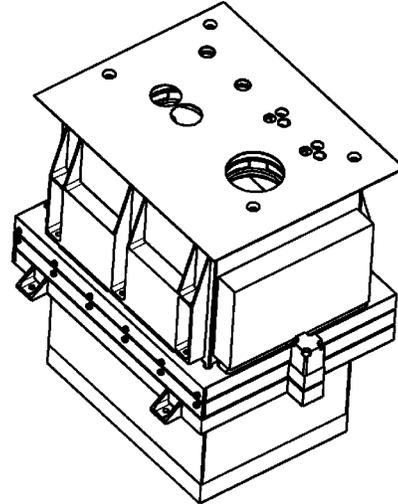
3-D-view of the VIRGO II⁺ sensor package with the mounting frame.
